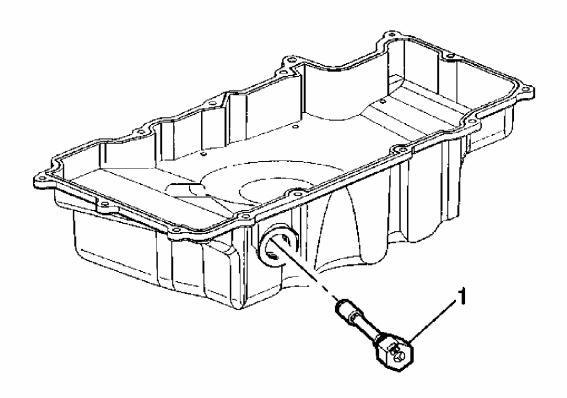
Identifying Oil Level Sensor Courtesy of GENERAL MOTORS CORP.
